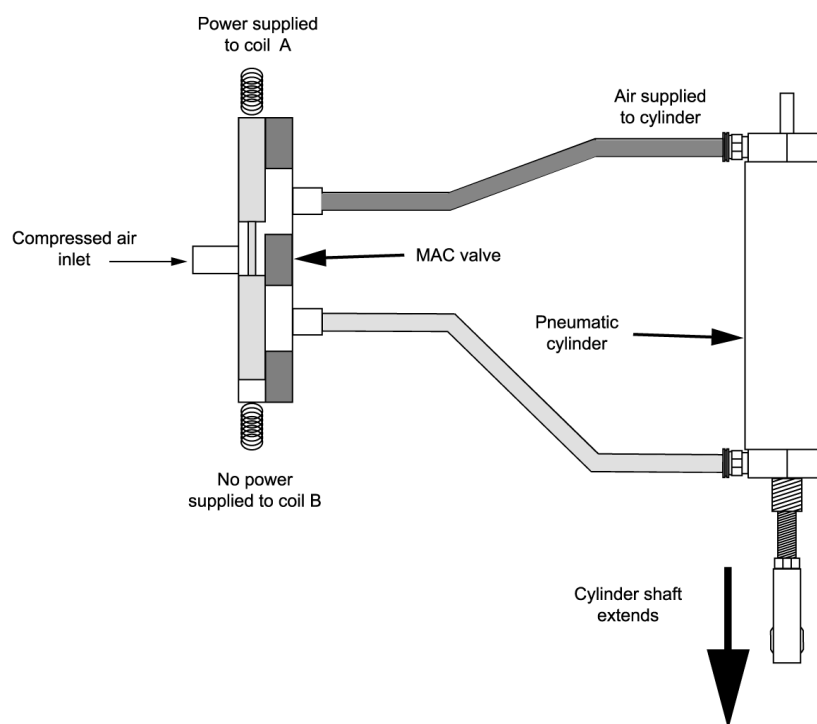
MAC Valve and Pneumatic Cylinder Operation – Cylinder Extending
